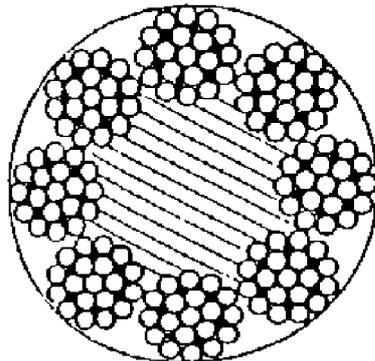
EXTRA FLEXIBLE 8 x 25 COMPENSATING AND GOVERNOR ROPE. FILLER-WIRE-STRAND. INCLUDES SIX FILLER WIRES WHICH ARE CONSIDERED AS NOT BEARING LOAD.
